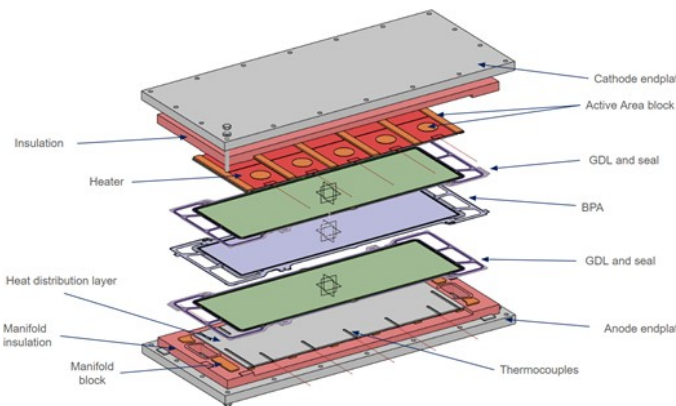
CAD drawing of the bipolar plate thermal cell.
